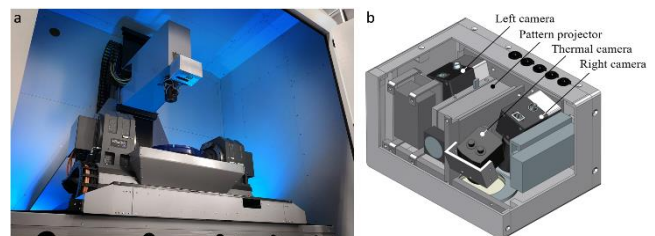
(a) 4D Hybrid machine; (b) Vision Box hardware components
